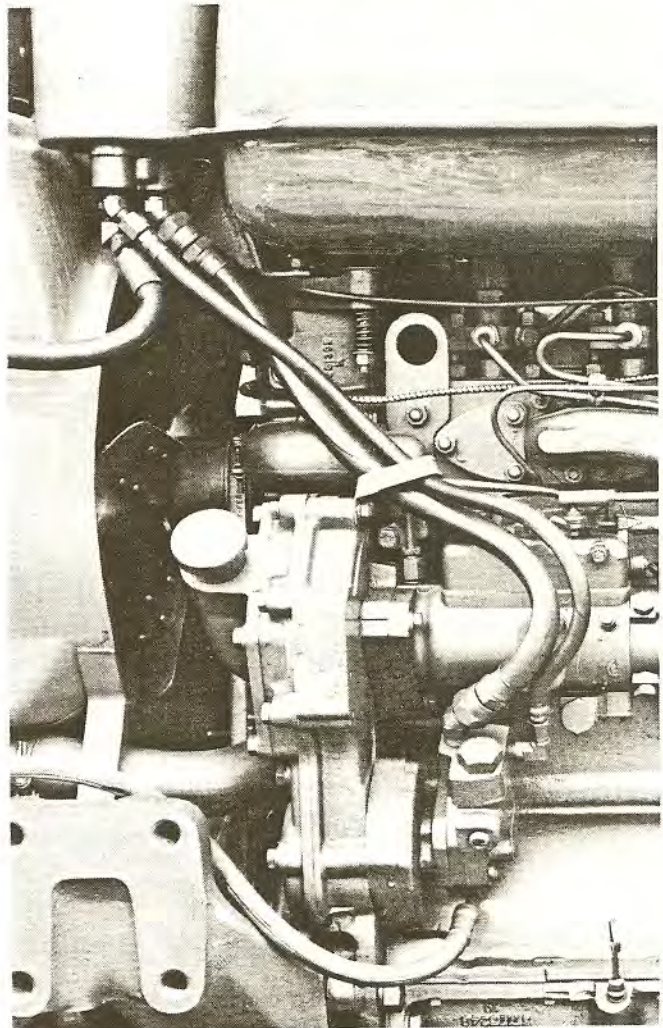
Barnes Pump Used on Early MF 65 Diesel Tractors
